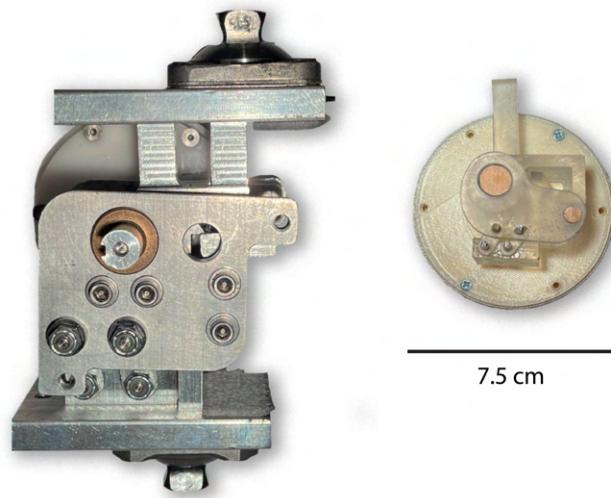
TO-SCALE PROTOTYPES OF THE PREVIOUS (LEFT, ALUMINUM) AND NEW (RIGHT, 3D PRINTED) MECHANICAL DESIGNS. FOR SCALE, THE DAMPERS BOTH HAVE A DIAMETER OF APPROXIMATELY 75 MM.
